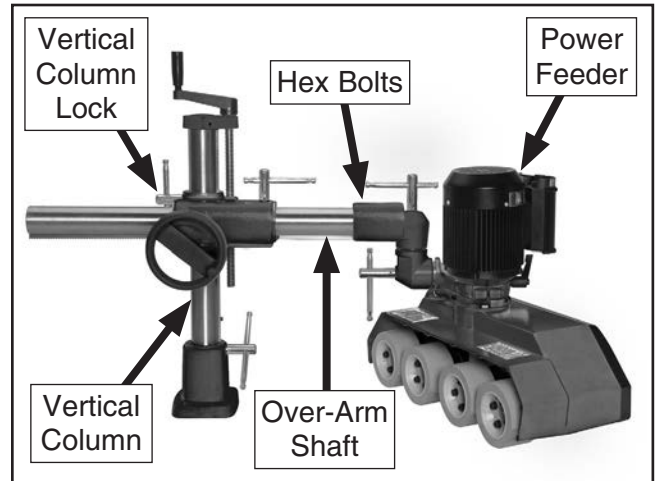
Power feeder attached to vertical column and over-arm shaft assembly.
